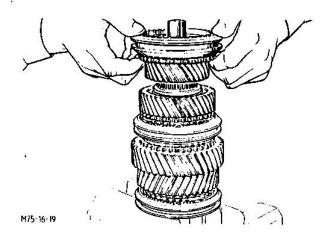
Remove 3rd/4th gear synchronizer unit complete with 3rd gear cog.
